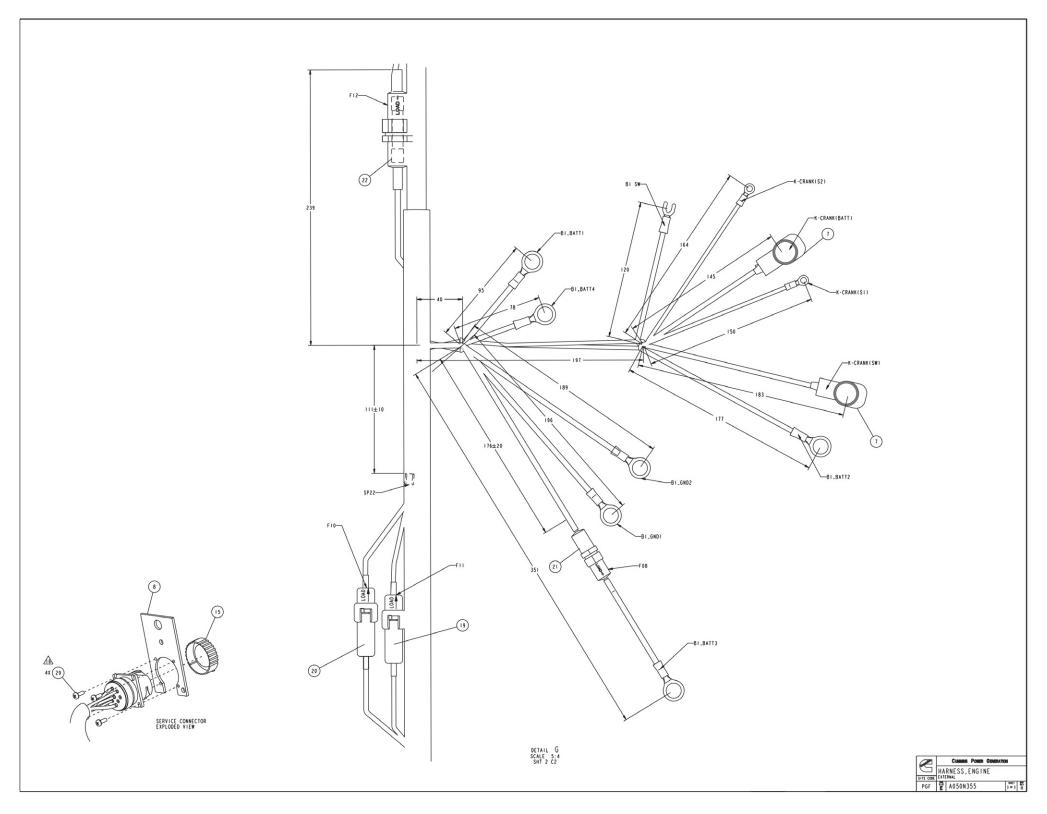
A050N355 ENGINE HARNESS (SHEET 3)
